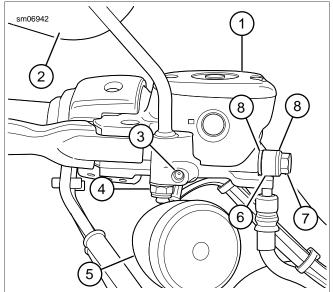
Verifying Front Brake Master Cylinder Bore Size (single disc master cylinder)
